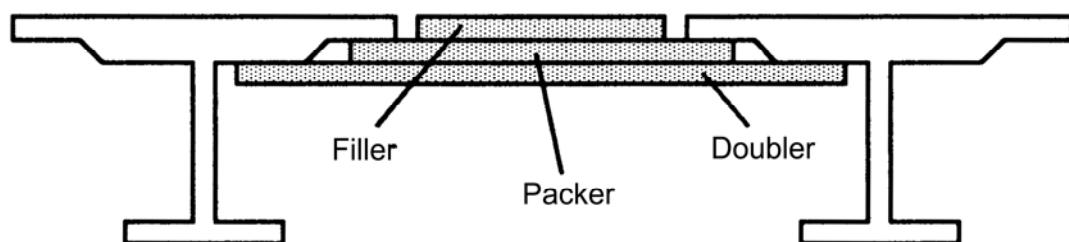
Bolted and bonded repair using a composite patch
